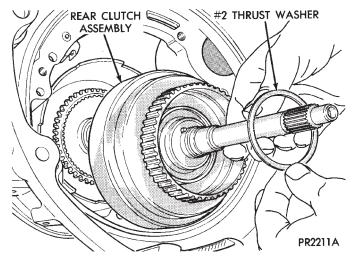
No. 2 Thrust Washer and Rear Clutch
